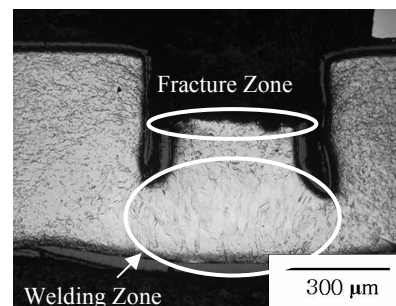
The OM image of welding heat-affected region in detail to observe the hydride in the welding zone.
